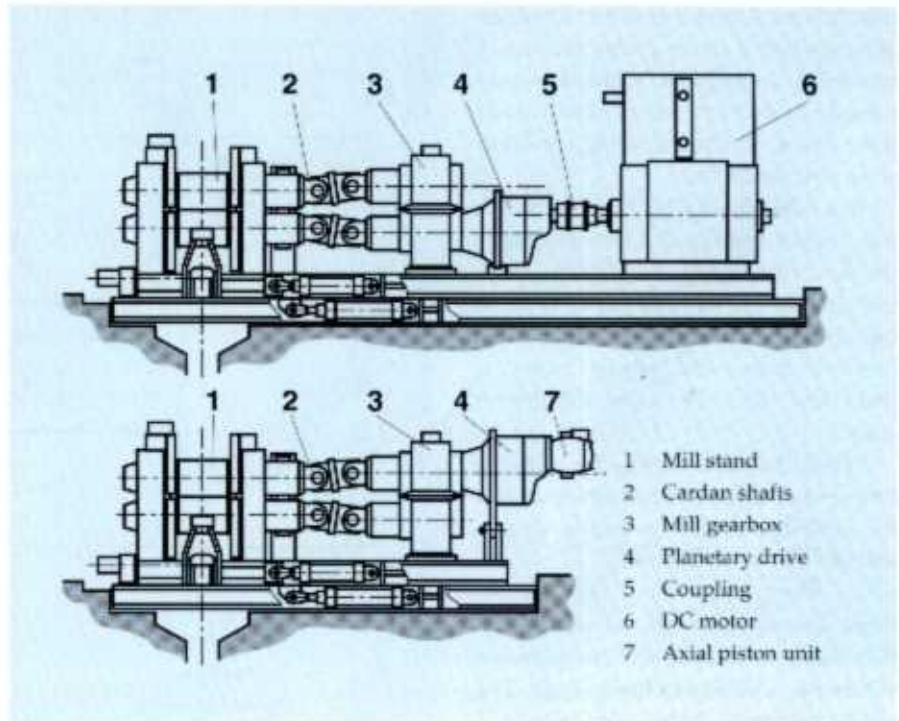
Roughing mill stand with electrical drive (top) and hydraulic drive (bottom)
